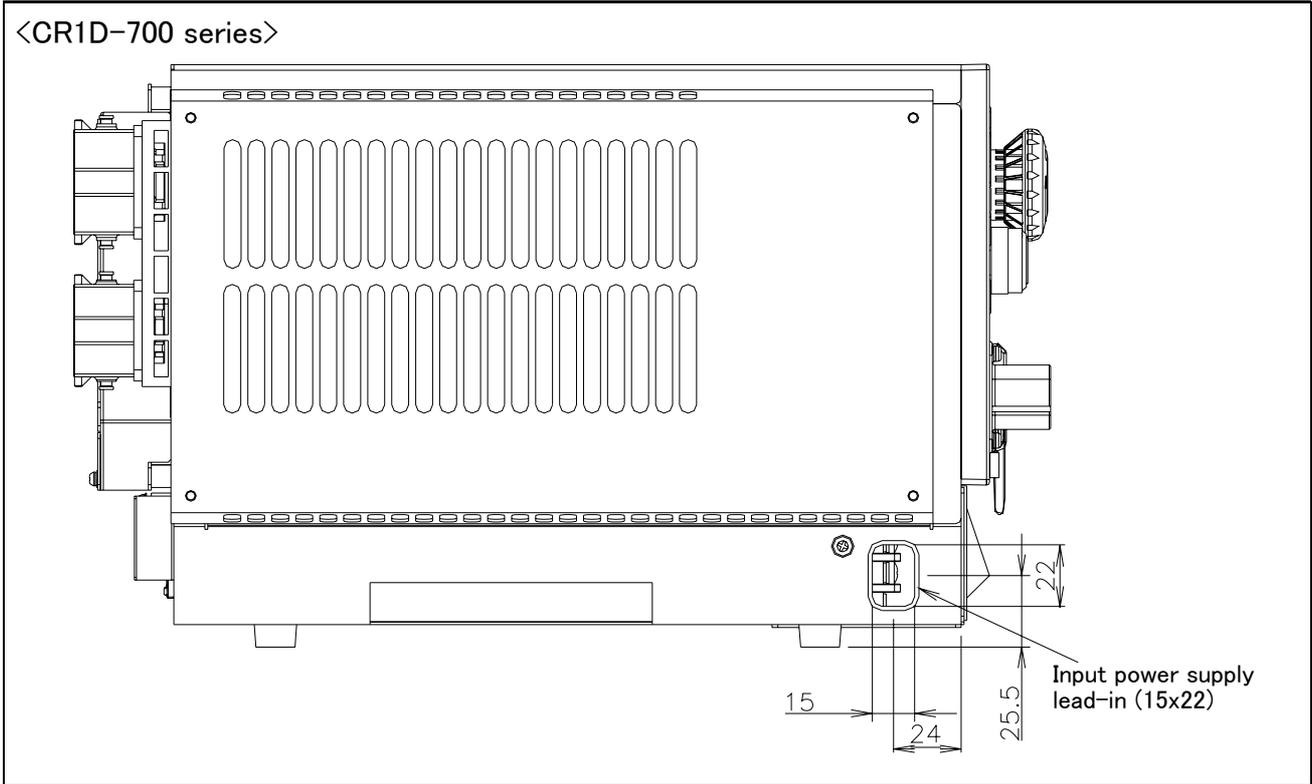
Cable lead-in and dimension of the controller (CR1D-700 series)
